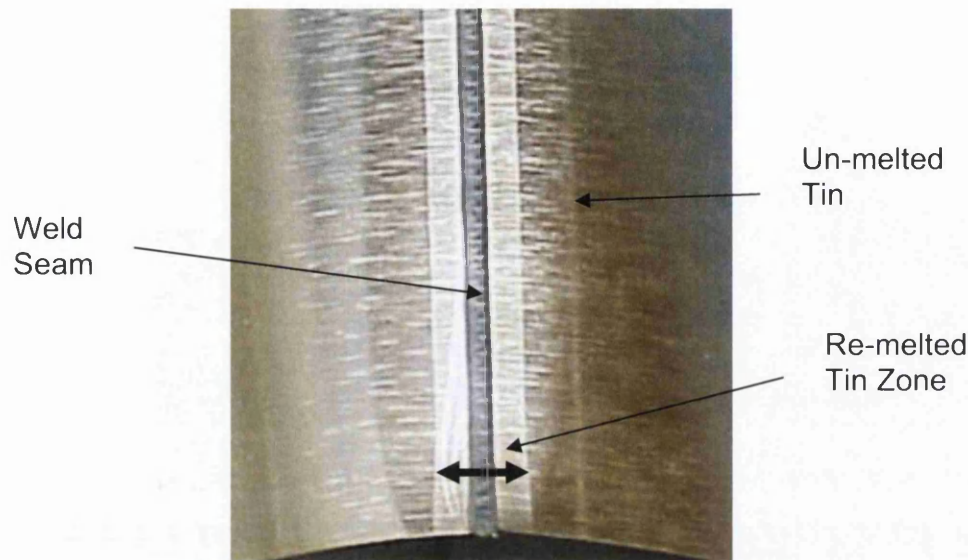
welded seam and the Re-melted Tin Zone.
